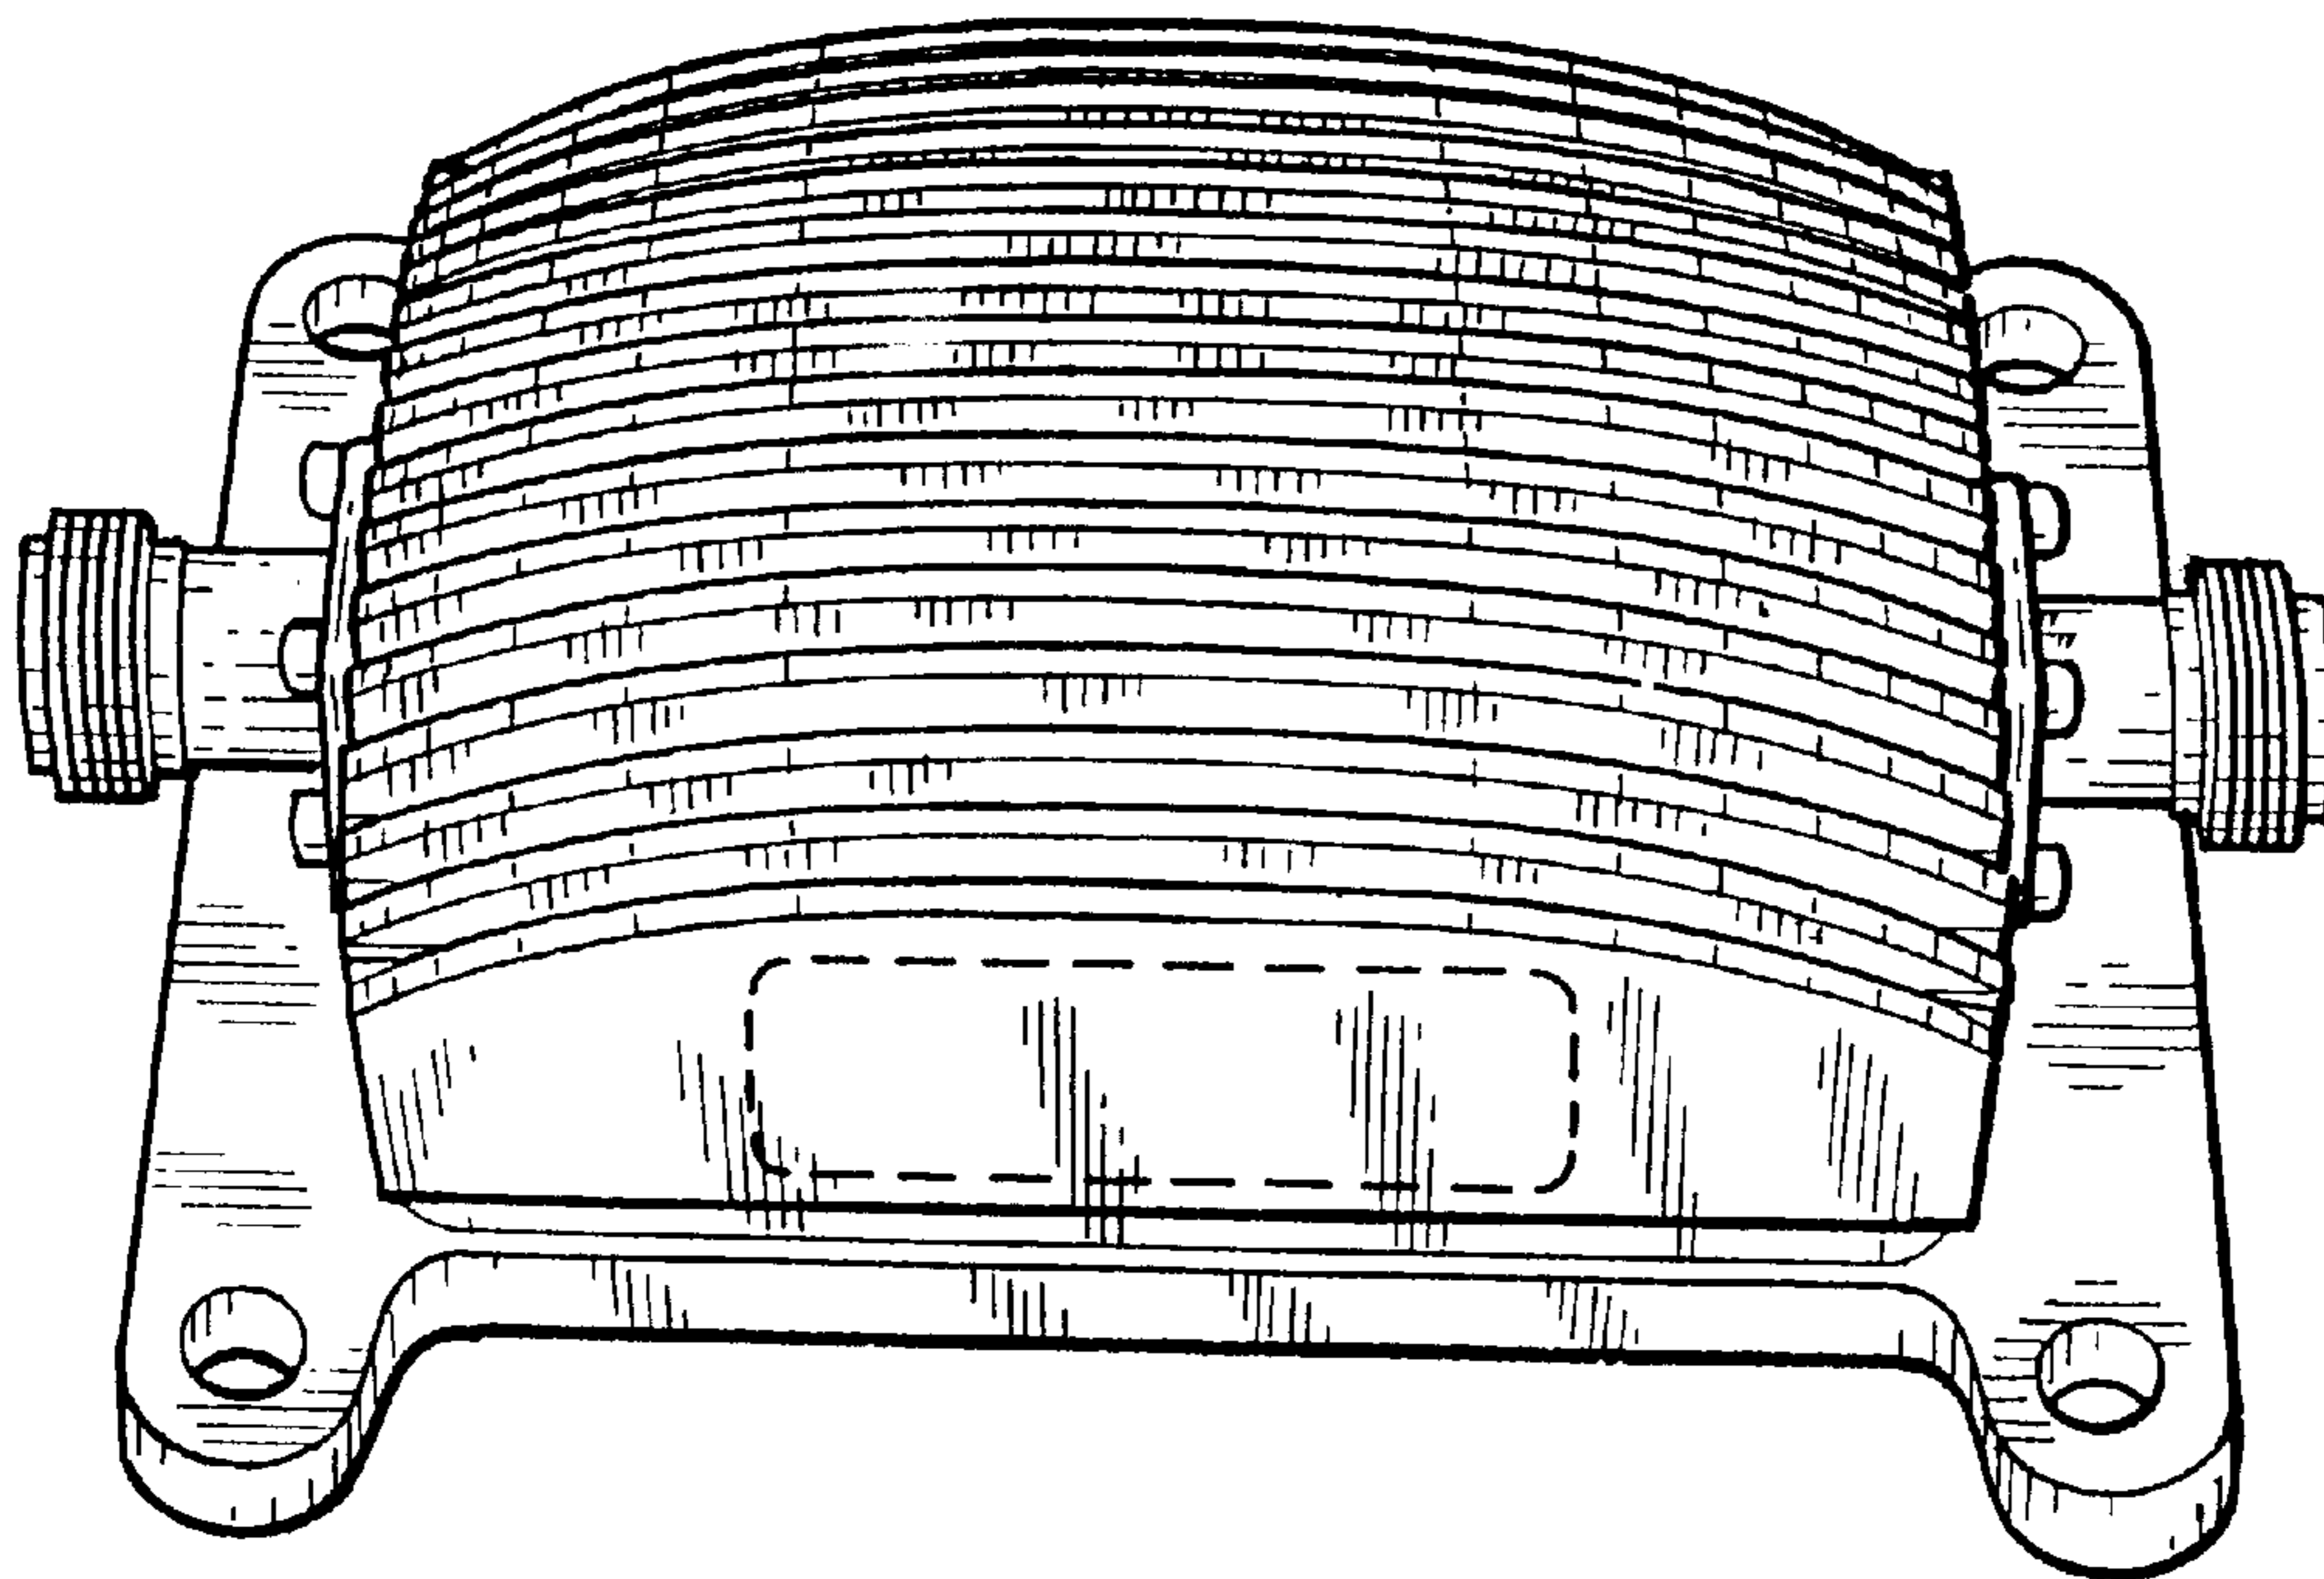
is a side photographic view of the housing according to FIG. 1.
